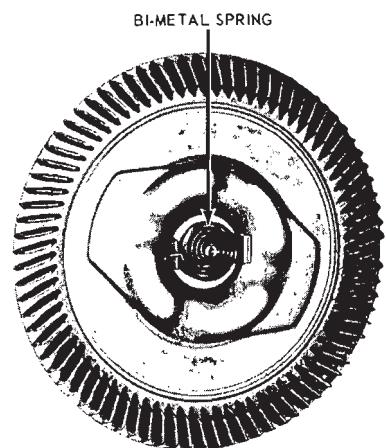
Fan Drive Clutch With Flat Bi-Metal Spring
